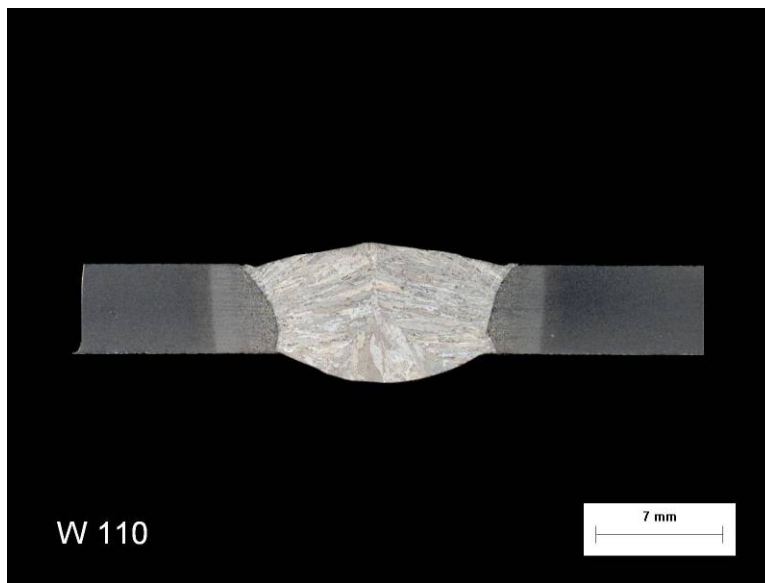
Weld with 3.0-mm Root Opening on 5-mm Plate
